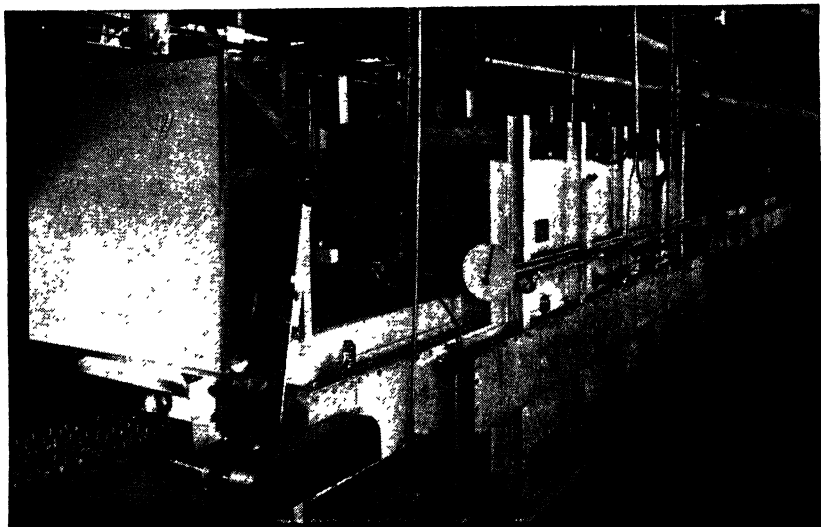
Roller-Hearth Sintering Furnace, Charging End. Door opening, 20 in. wide, 8 in. high; heating chamber, 10 ft long; cooling chamber, 30 ft long; rated 110 kw.
